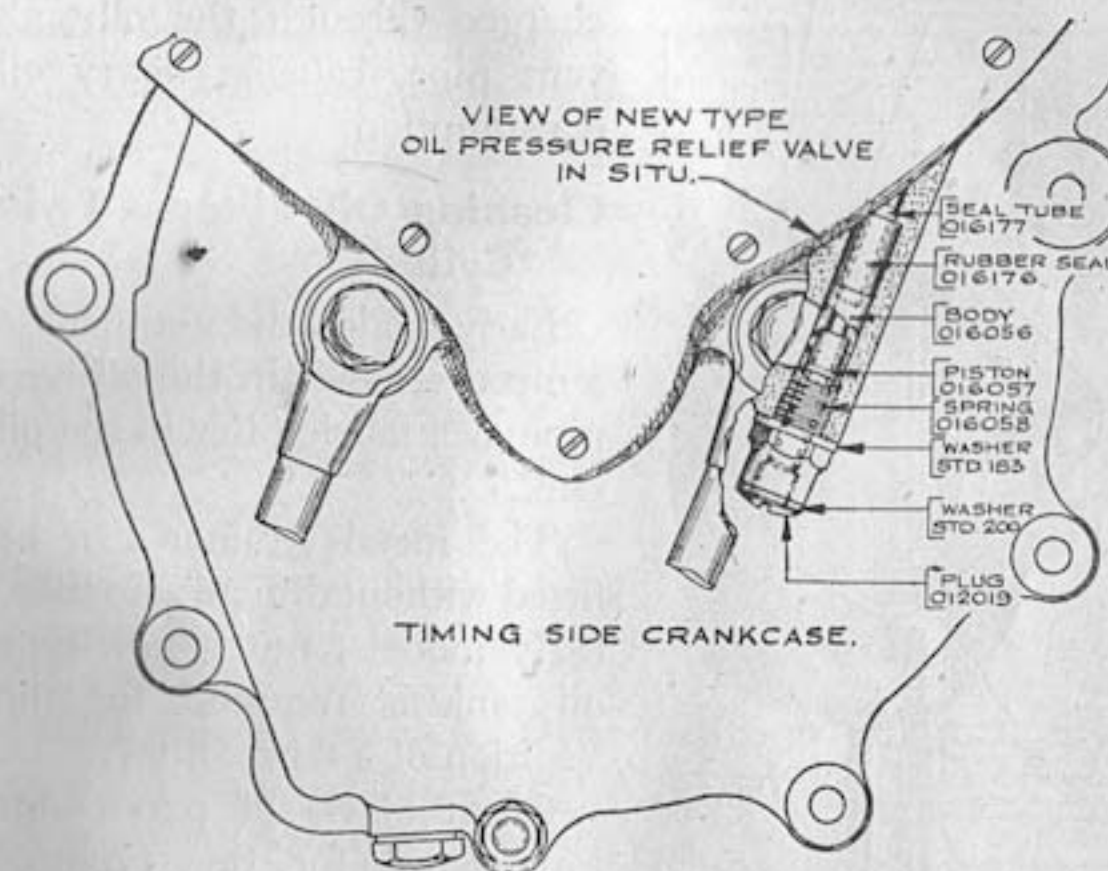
TIMING-SIDE CRANKCASE, SHOWING POSITION OF OIL-PRESSURE RELEASE VALVE.
